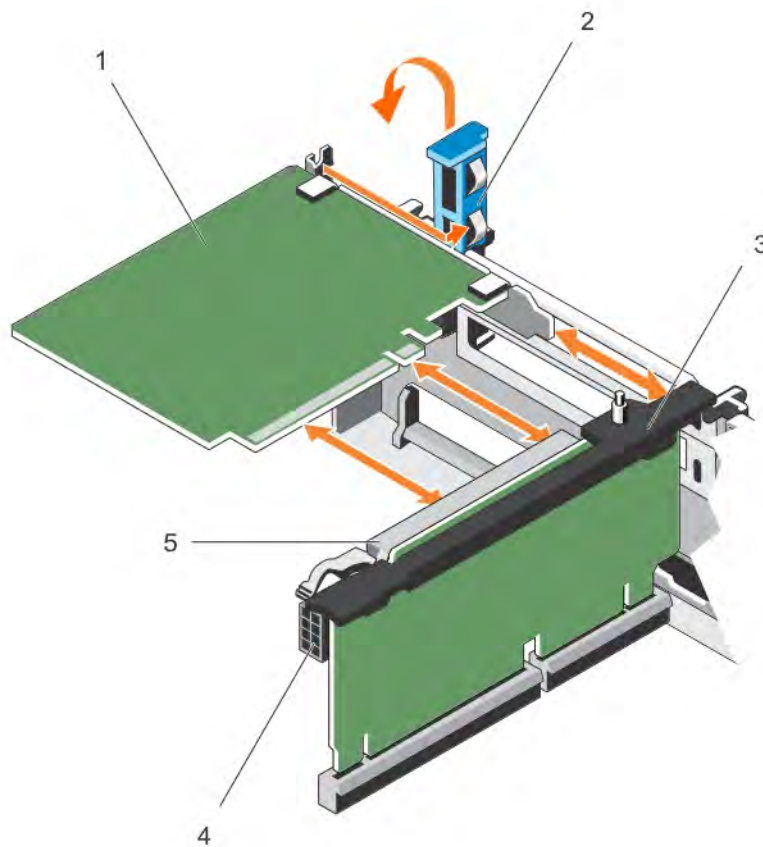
Removing and installing an expansion card from expansion card riser 2 or 3
